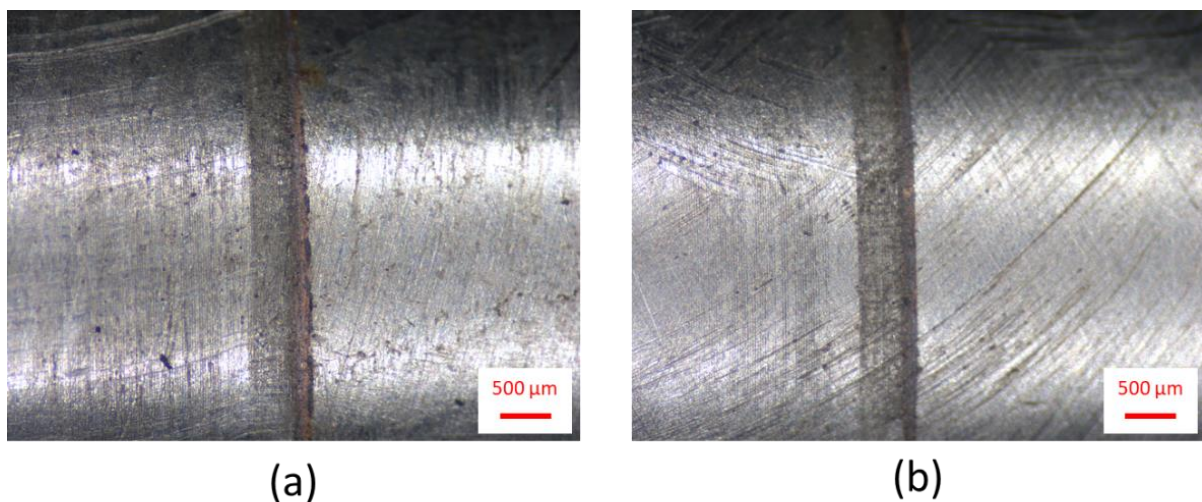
Cylindrical surface of the shafts at the bushing end contact after test (a) S06 (outcome: run out), and (b) S29 (outcome: run out)
